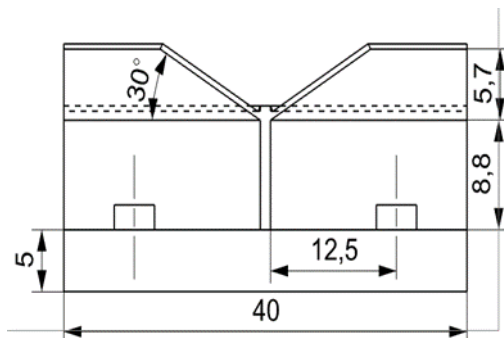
Side View Of The Sensor Array (All Dimensions In Mm)
